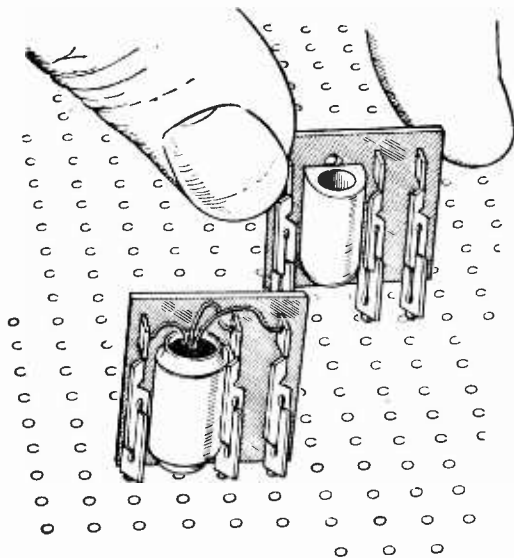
Commercially available transistor mounts which plug into special sockets.
